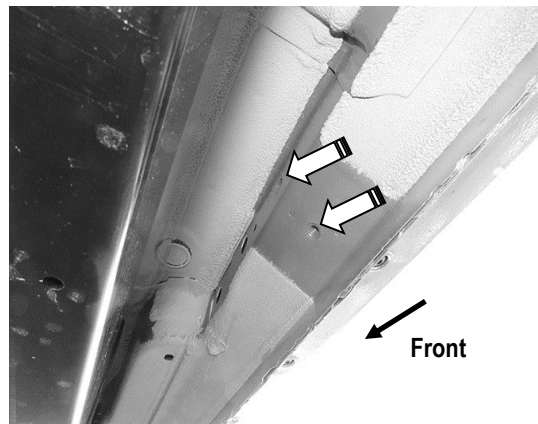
Passenger Front Mounting Bracket (PFM) Installed
